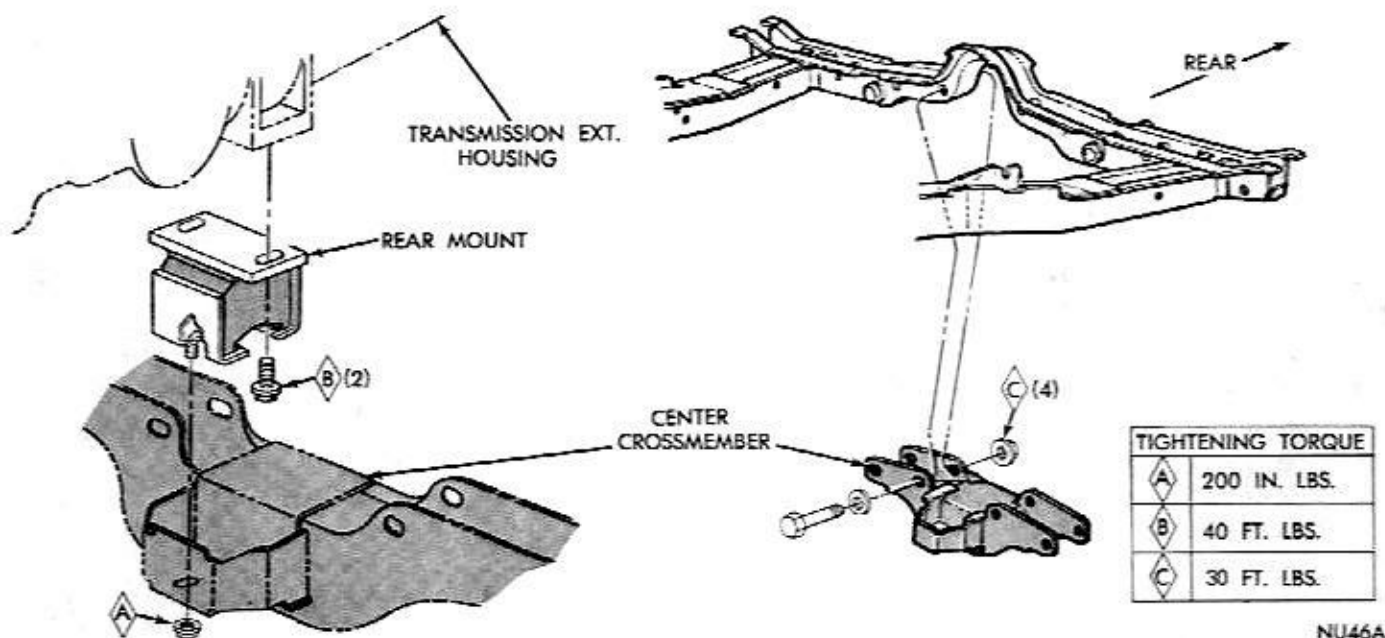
Center Crossmember and Rear Engine Mount (Coronet-Charger)
